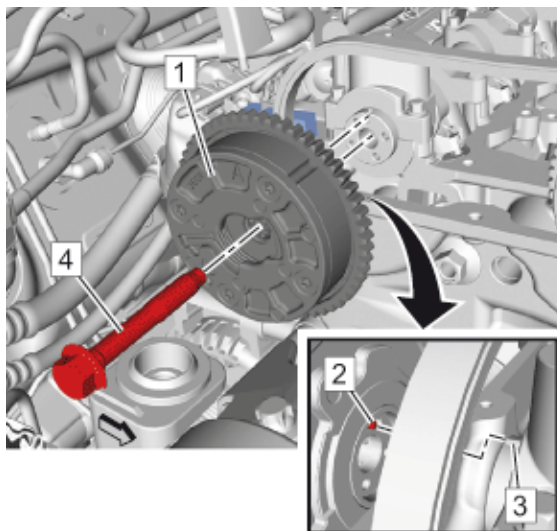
Intake Camshaft Position Actuator, Dowel Pin, Camshaft And Bolt
